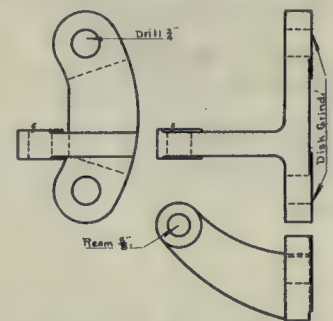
SUPPORT FOR LEVER OPERATING EXHAUST VALVE.
